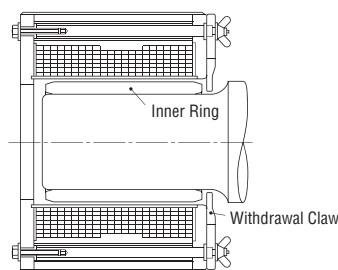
Removal of Inner Ring Using Induction Heater
